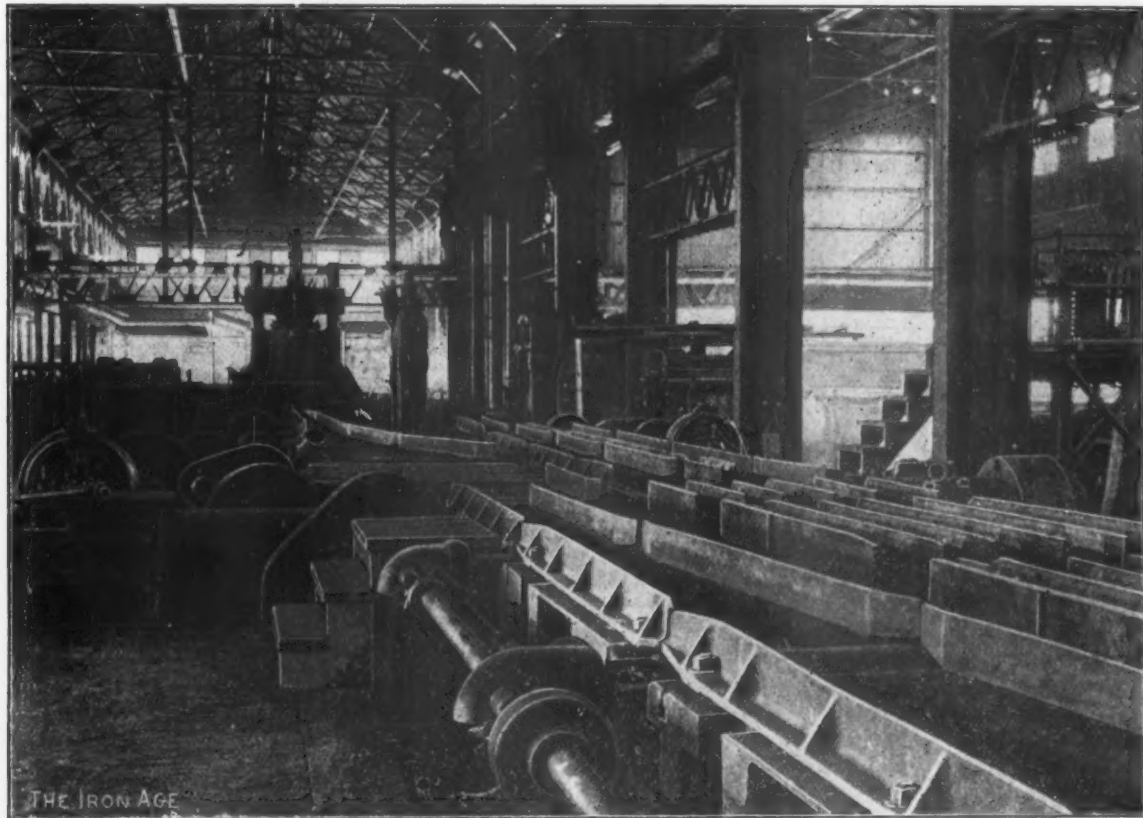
Lower End of 26-Inch Mill, Transfer Table and Switch.
